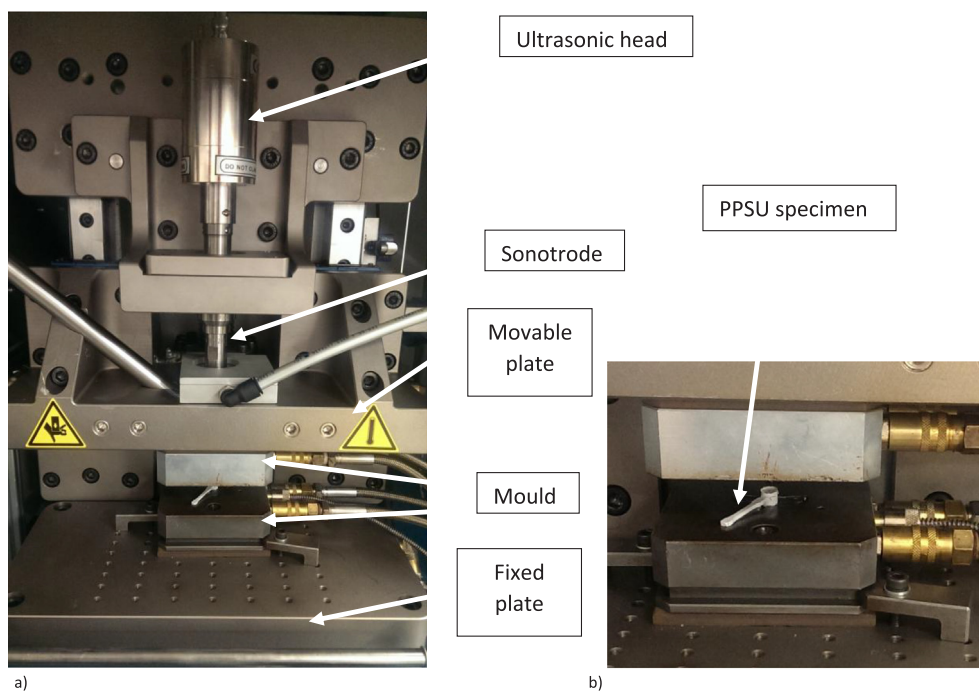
Experimental setup: a) ultrasonic moulding machine, b) mould and specimen.
